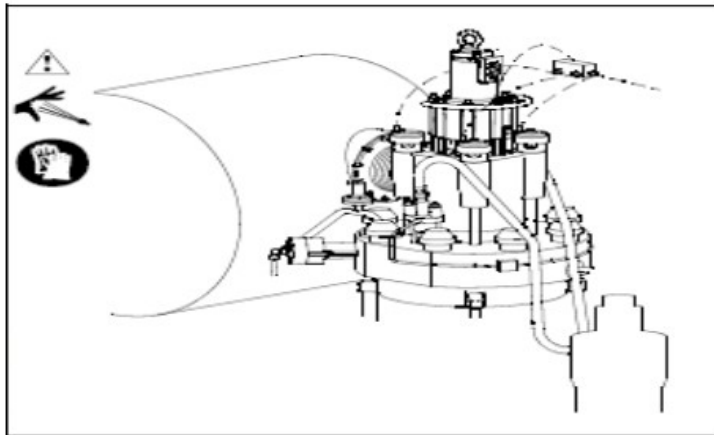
Bleed hydraulic system for disassembling exhaust valves [1]
